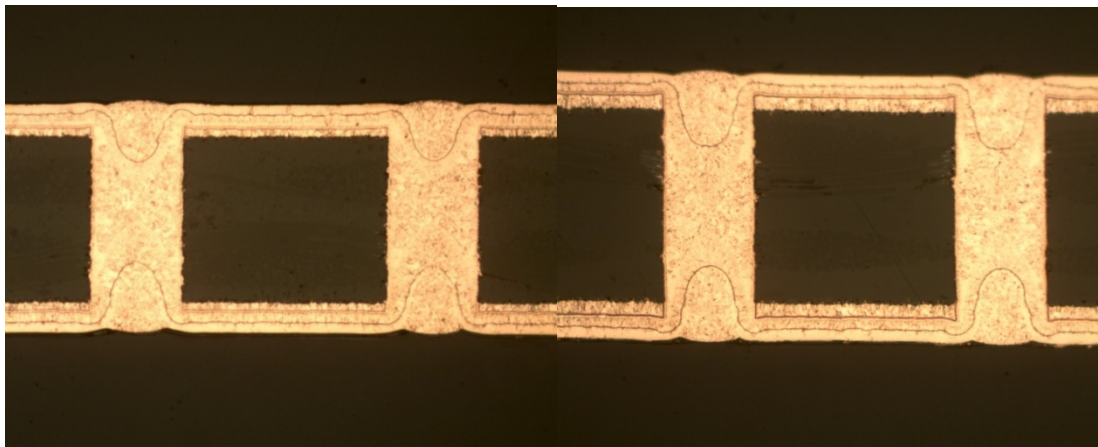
MECHANICAL DRILLED THROUGH HOLE, CORE THICKNESS OF 200 μm
